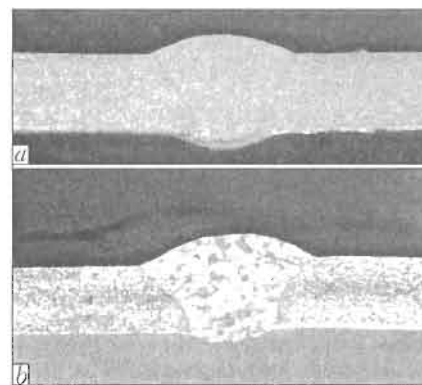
Structures of the AMg5M ($\delta = 3\text{ mm}$) alloy butt joints obtained using the CO₂-laser radiation and AMg6 1.2 mm filler wire: a — laser welding ($P = 2\text{ kW}$, $v = 30\text{ m/h}$); b — hybrid welding ($P = 2\text{ kW}$, $v = 120\text{ m/h}$, $I_d/I_{rev} = 100/50\text{ A}$, $U = 20\text{ V}$)
